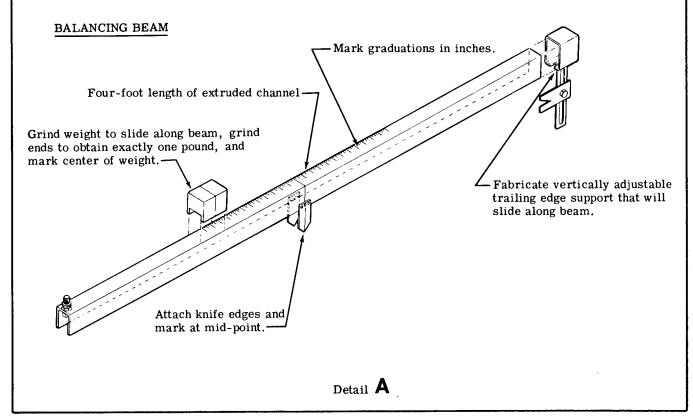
Control Surface Balancing (Sheet 2 of 5)
